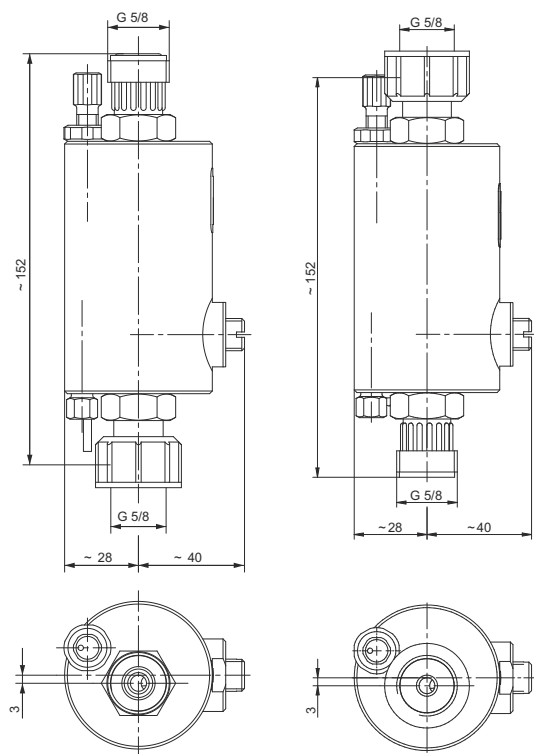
Dimensioned drawing of flow meter FLOWCON LP 1 / LP2
